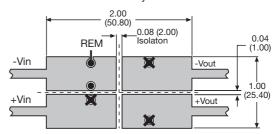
Optimum PCB layout for Single Output CXA10's on a double sided PCB
